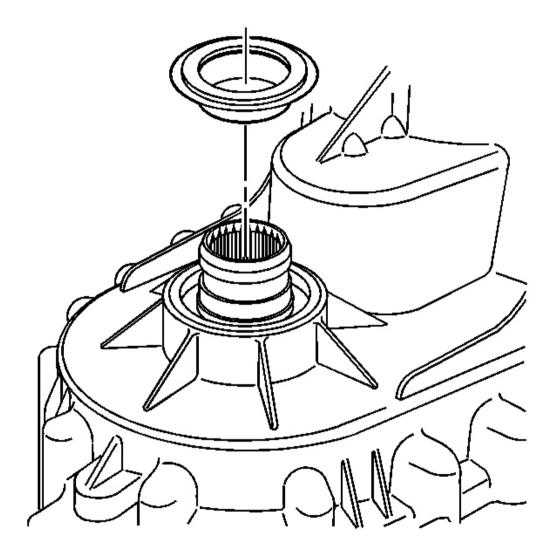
Inner Seal Race Courtesy of GENERAL MOTORS CORP.
